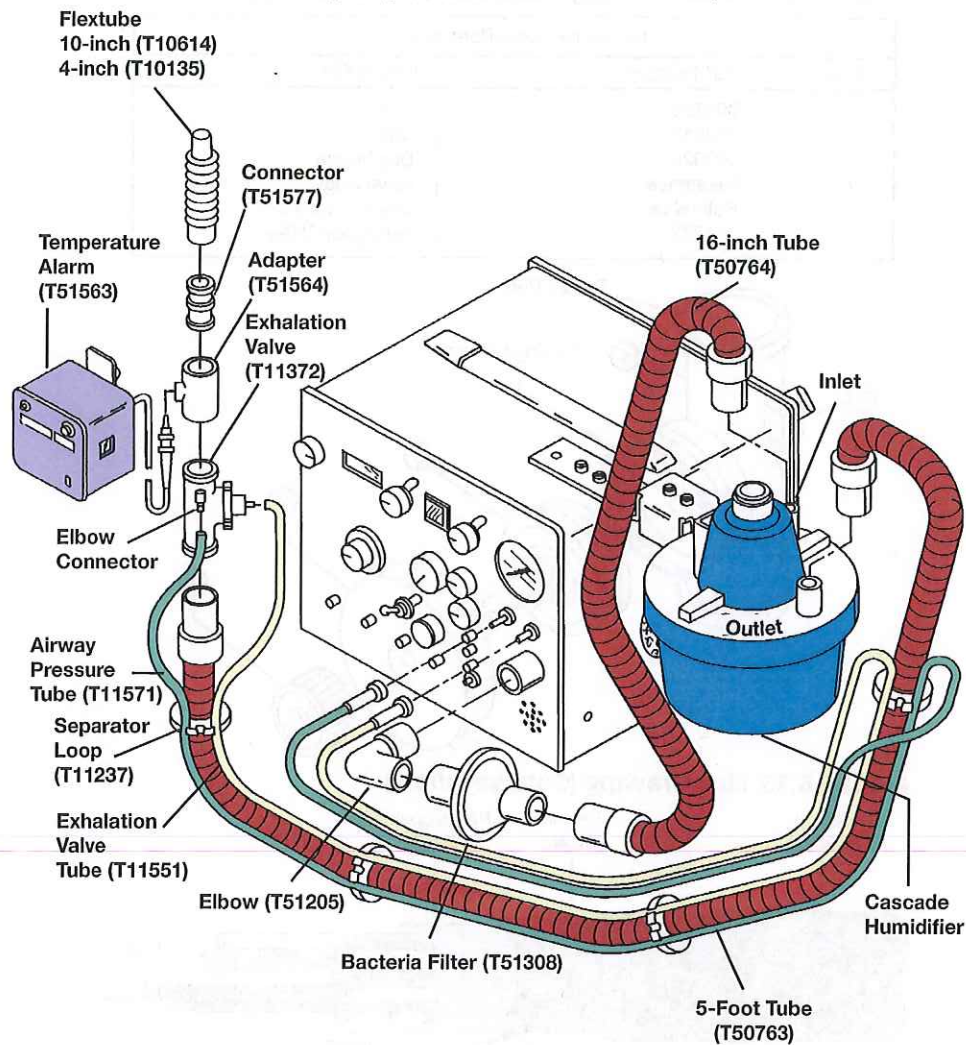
Line Drawing (Exploded View with Callouts)
